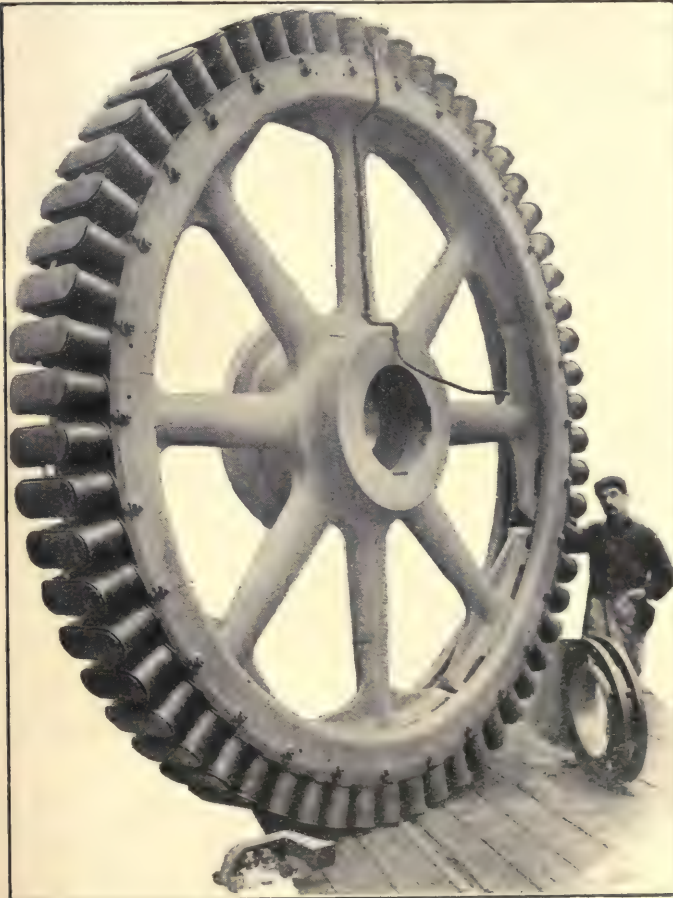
shows such a magnet-wheel separately. To magnetise the poles, the projecting iron cores are wound with massive coils, usually composed of copper strip about 1 in. broad and $\frac{1}{16}$ in. thick, wound edge-wise. The magnetising current must be brought from a continuous current machine, called an *exciter*; and, as it must be brought to the revolving structure, sliding contacts are necessary, two slip-rings being fixed on the shaft to receive the exciting current from the contact-brushes and to convey it to the magnetising windings. These slip-rings are seen in 80 ready to be fixed upon the shaft.
